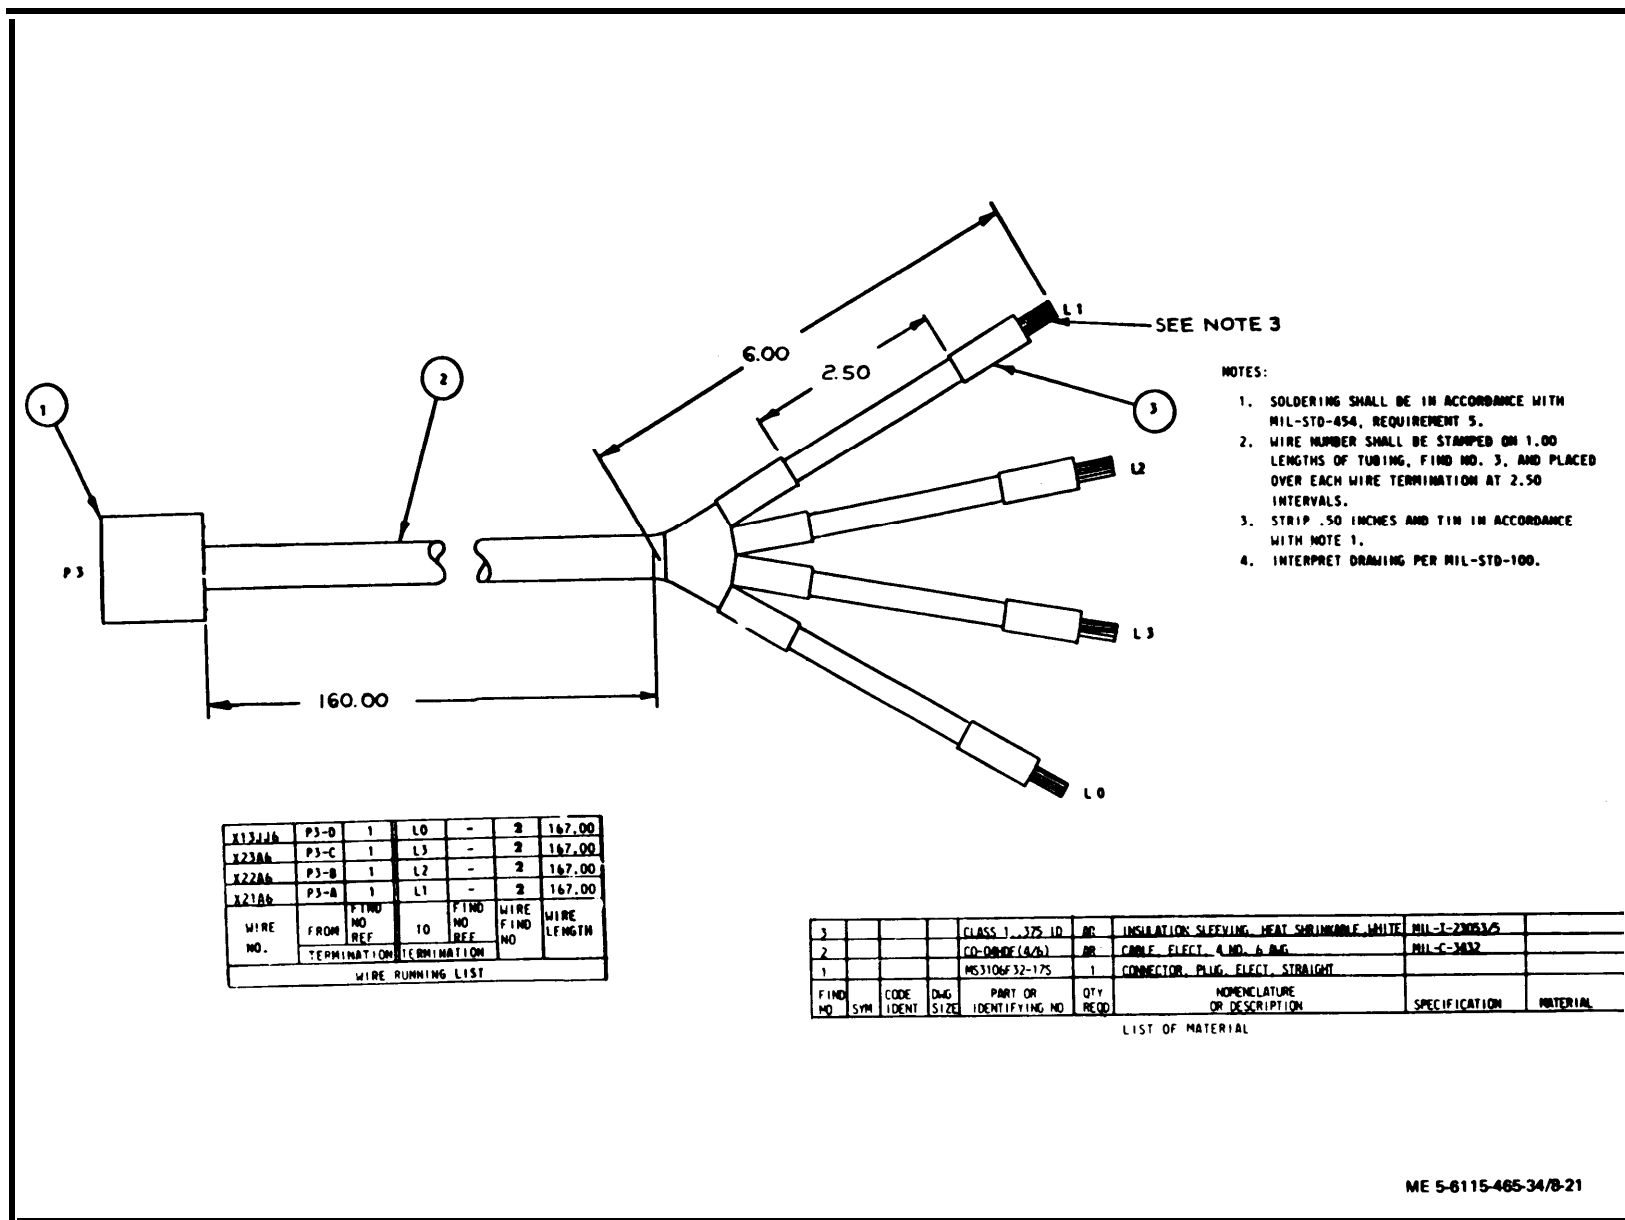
Bottom Load Bank Wiring Harness (Sheet 1 of 2), Drawing No. 72-2825
